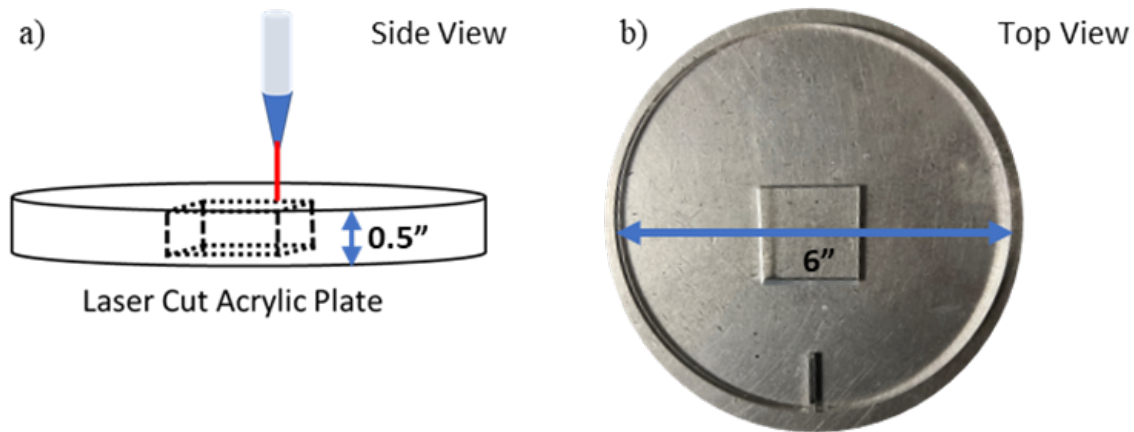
a) Side view schematic of centering template and b) top view photograph of the centering template used to align the specimens before testing.
